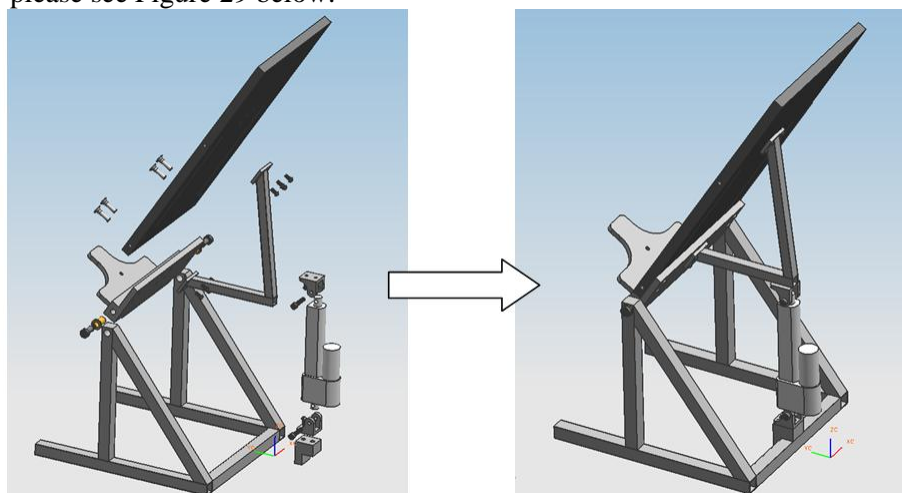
Exploded to assembled view of frame, actuator, and PVC chair back.
